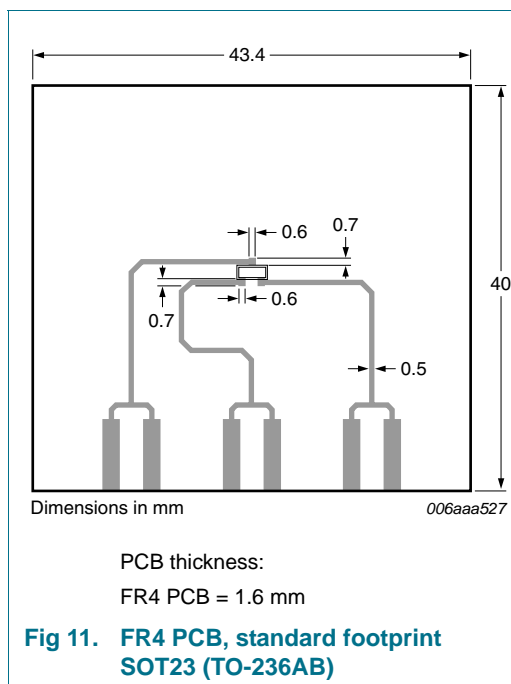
FR4 PCB, standard footprint SOT23 (TO-236AB)
